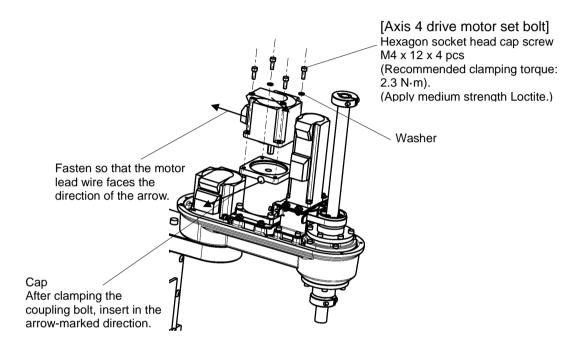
Mounting axis 4 motor (KHL-300, KHL-400)
